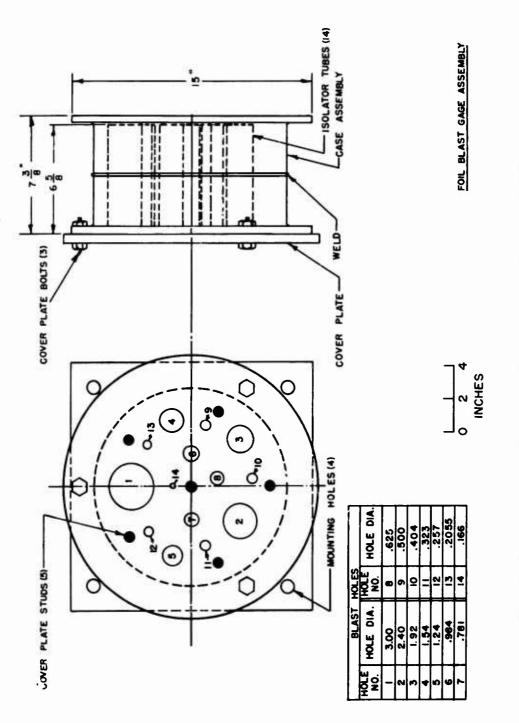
Foil-rupture Gauge Indicating Gauge Hole Numbering and Diameters, As Well As Other Mechanical Details
